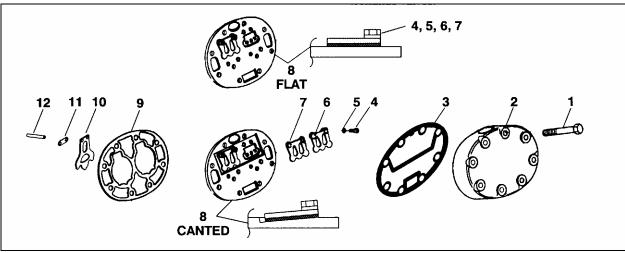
(1) Capscrew; (2) Cylinder head; (3) Cylinder Head Gasket; (4) Capscrew; (5) Lockwasher; (6) Discharge Valve Stop; (7) Discharge Valve; (8) Valve Plate; (9) Valve Plate Gasket; (10) Suction Valve; (11) Position Spring; (12) Dowel Pin.
